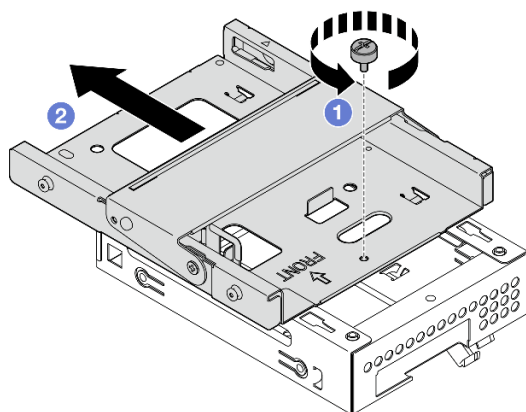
Removing the optical drive cage from the bay 2 drive cage
